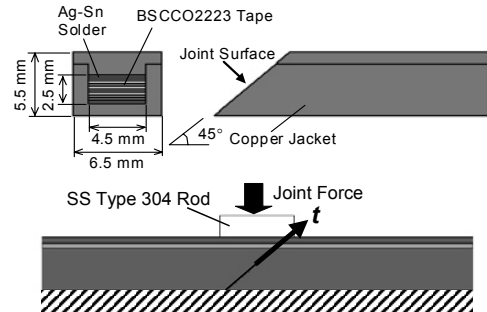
Schematic views of a stacked BSCCO 2223 cable with copper jacket and mechanical butt joint of the cable.
